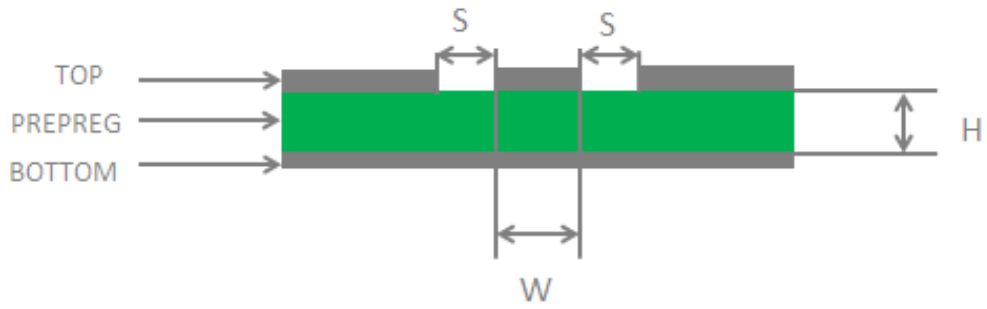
Coplanar Waveguide Design on a 2-layer PCB
